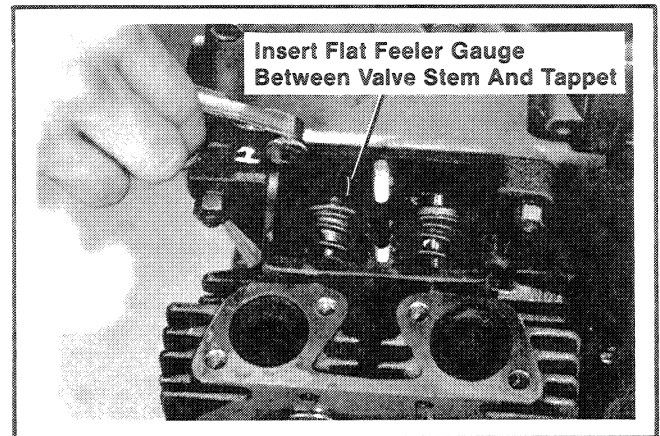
Measuring Valve-To-Tappet Clearance.
